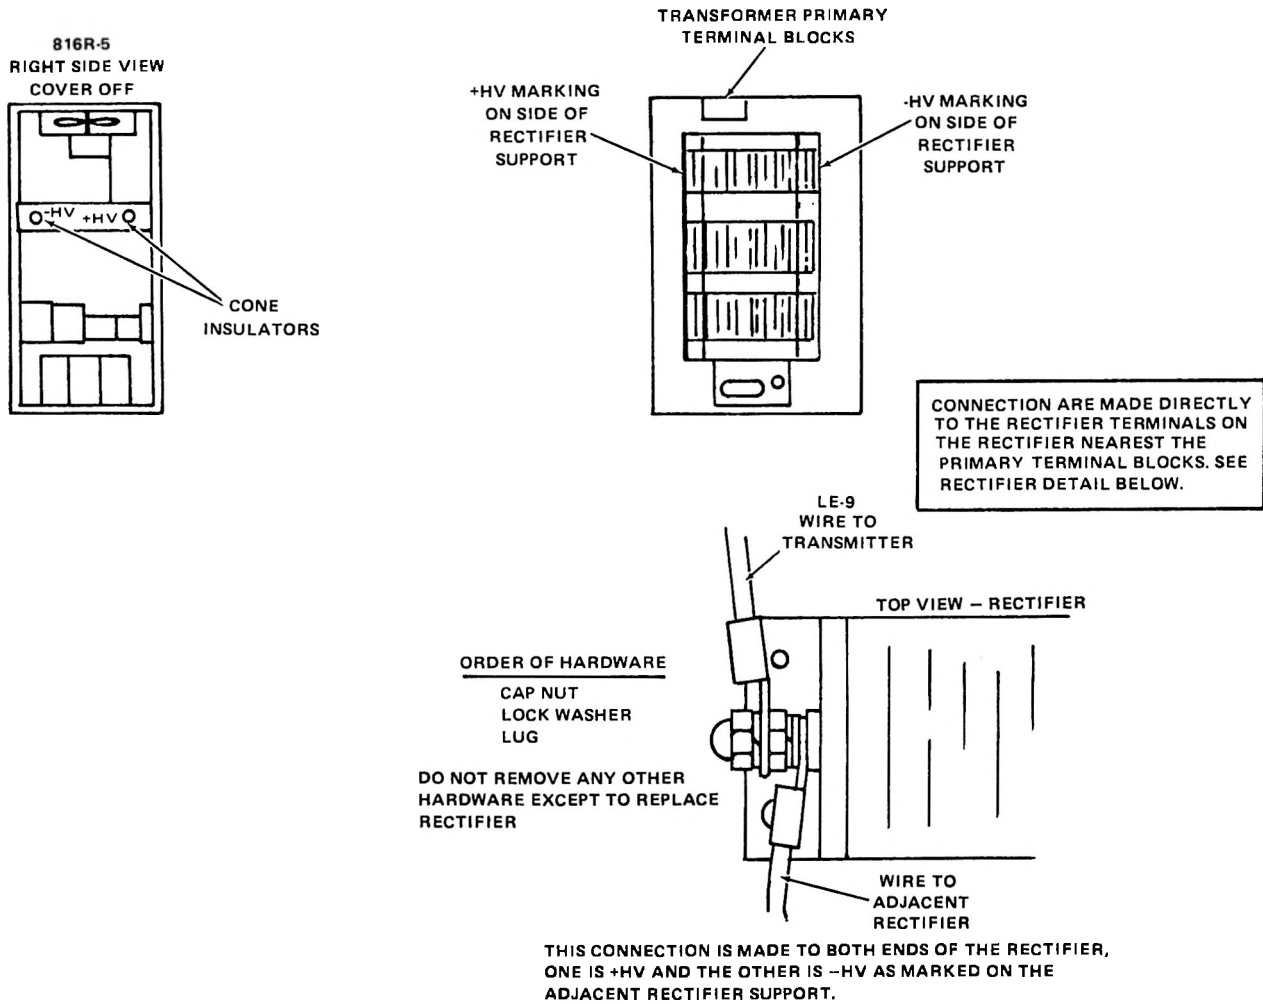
Interconnecting Transmitter and Plate Transformer Assembly
